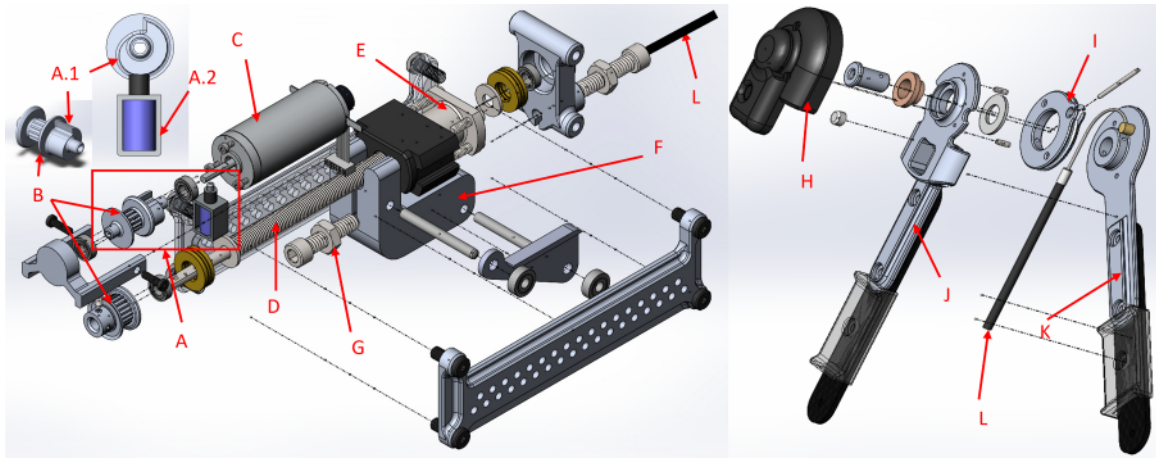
Computer-aided 3D model of the orthosis actuator mechanisms. A—brake/cam mechanism; A.1—cam profile; A.2—solenoid; B—belt-driven pulley; C—motor; D—Thomson ball screw; E—ball screw nut; F—sled; G—Bowden cable seat; H—elbow mechanism cover; I—Bowden cable channel; J—upper arm attachment; K—forearm attachment; L—Bowden cable. Image scales vary.
